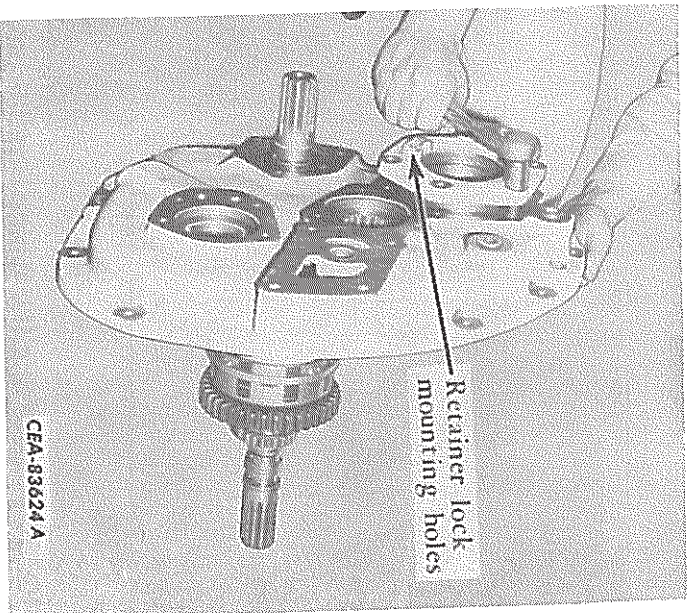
Installing the Pinion Shaft Front Bearing Cage
